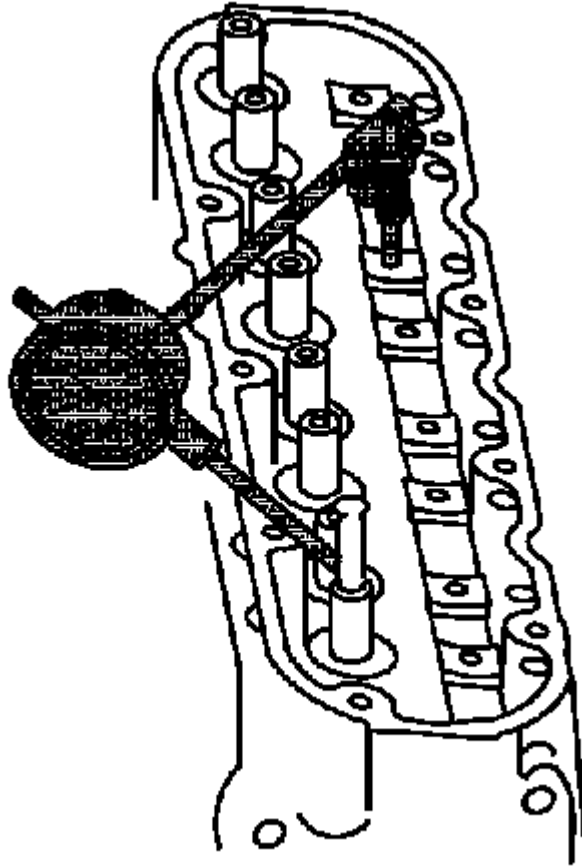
Measuring Valve Stem-To-Guide Clearance
